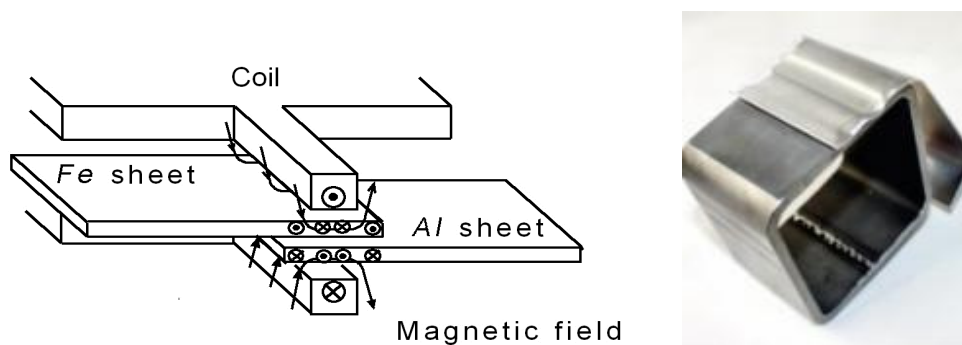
Electromagnetic pulse sheet welding (Source: PST Products)
